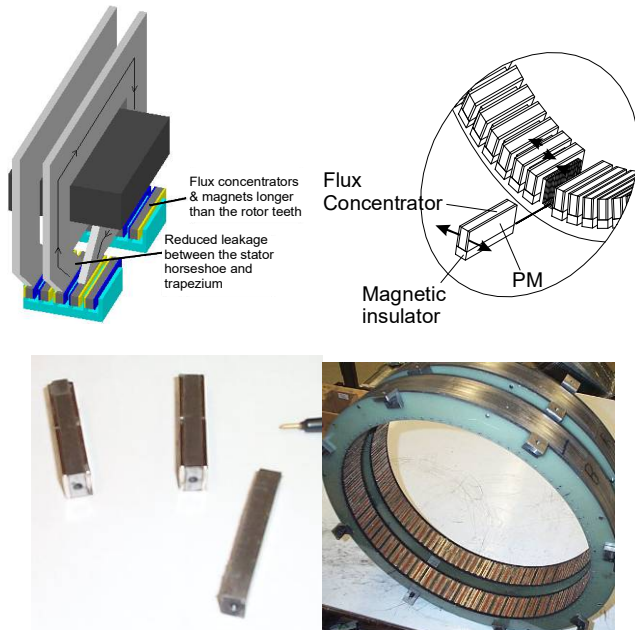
Prototype of TFBM machine with toothed rotor equipped with Flux concentrators made of SMC material
